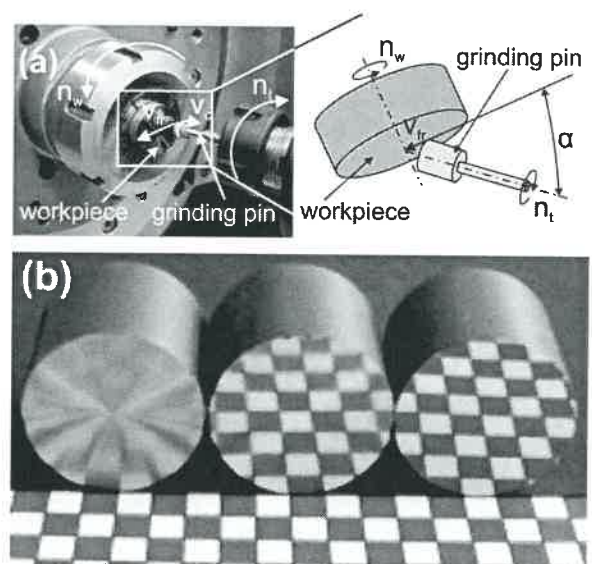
(a) Precision grinding of a tungsten carbide mold insert with a pin-type diamond grinding wheel; (b) different ground mold inserts after conventional pre-machining (left), precision rough (centre) and fine grinding (right)
